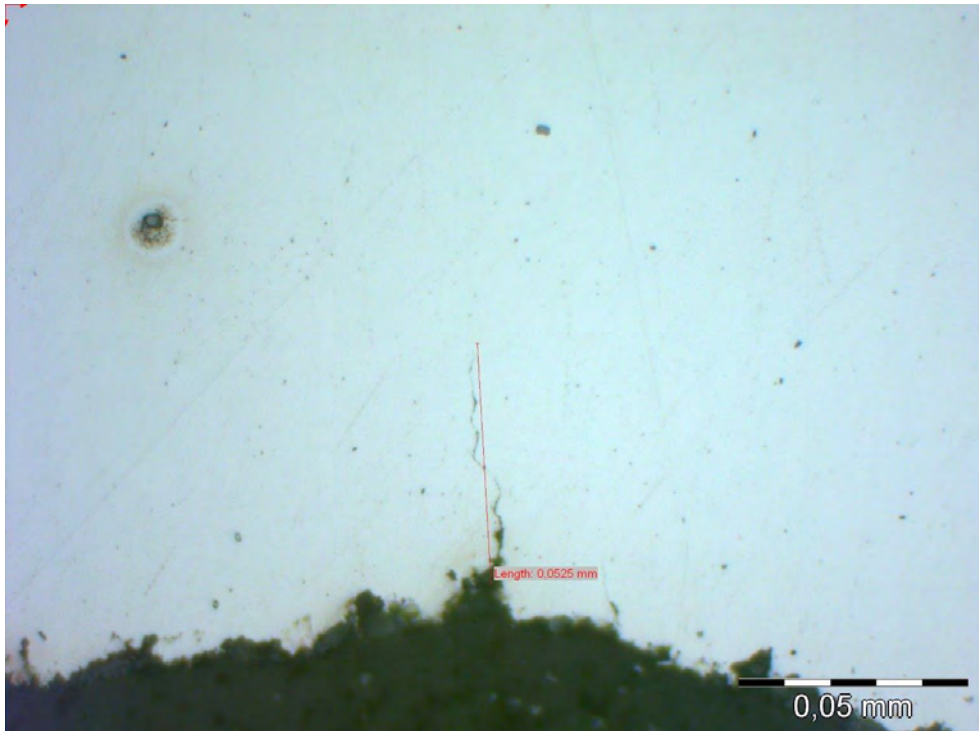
Cut two in crack at segment A, second ridge on barrel no. 14389
